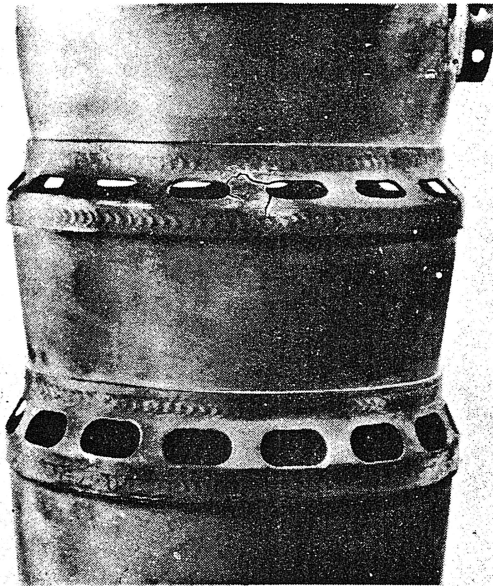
Cracks shown in fig. 6 welded by argon-arc process
